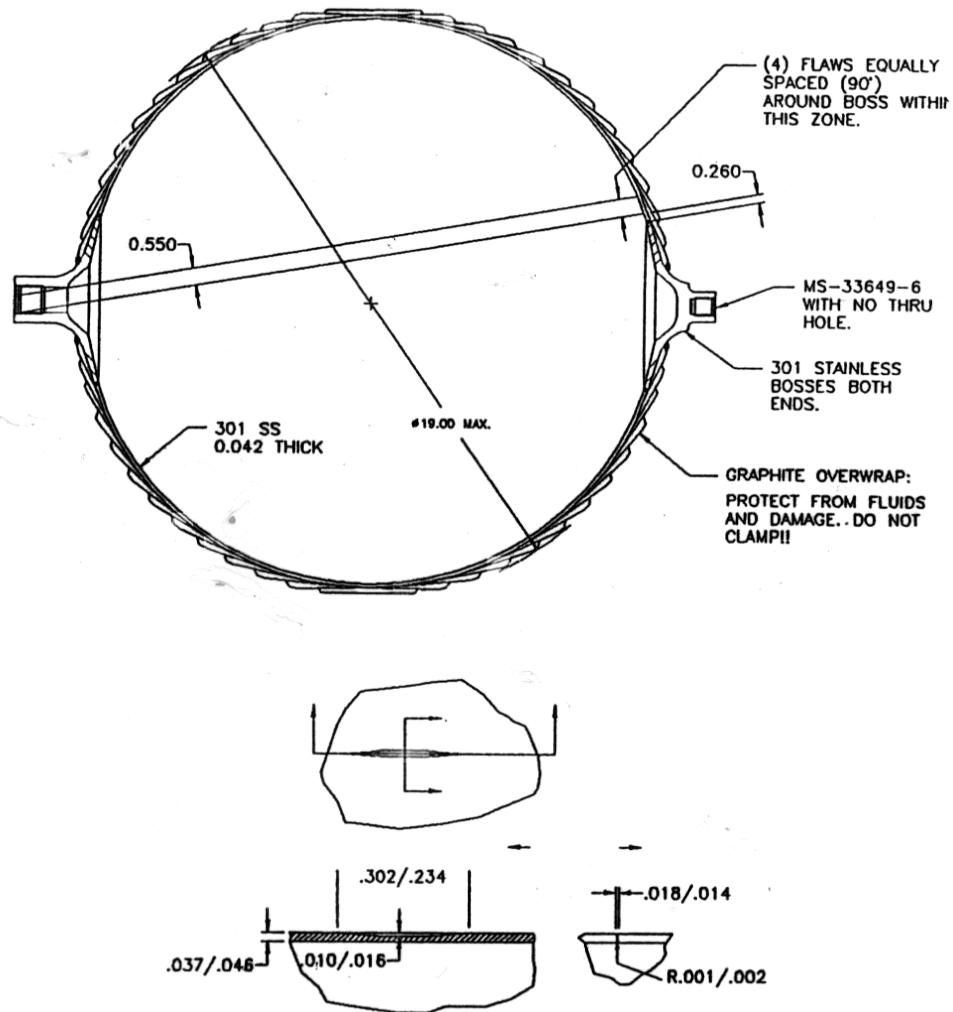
Manufacturer's sketch of flaw dimensions and placement for 19 in. dia spherical COPV.
